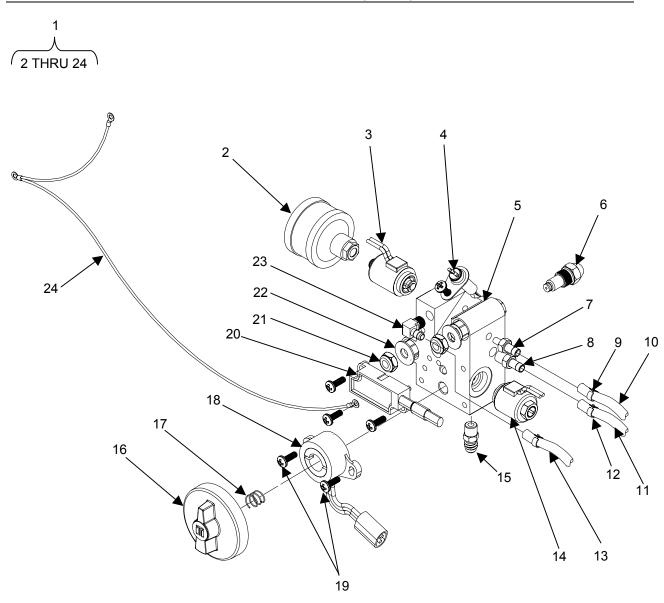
Fuel Delivery Block Assembly (Sheet 1 of 2)
